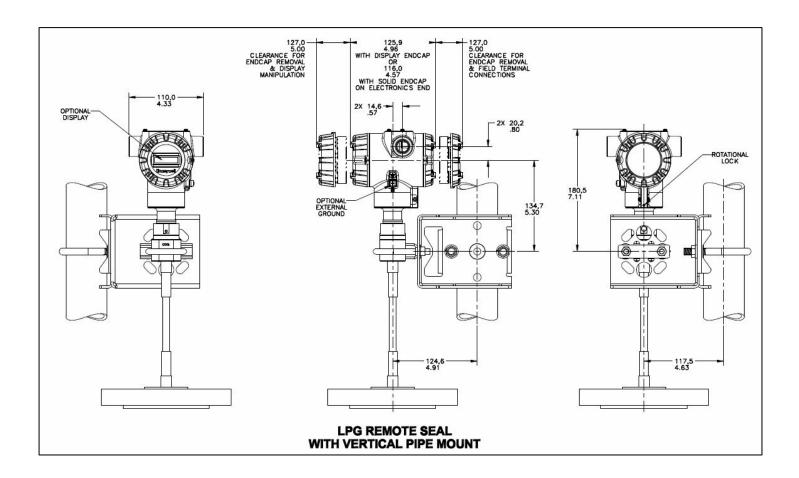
Approximate vertical mounting dimensions for Remote Seal Transmitter
